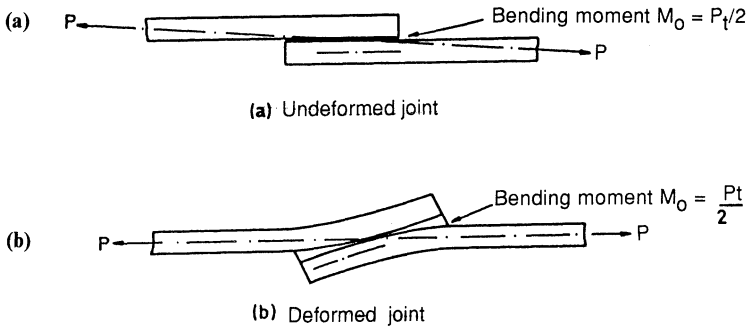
Single lap joint. (a) Unloaded single lap joint; (b) loaded single lap joint showing an aligned neutral axis.
